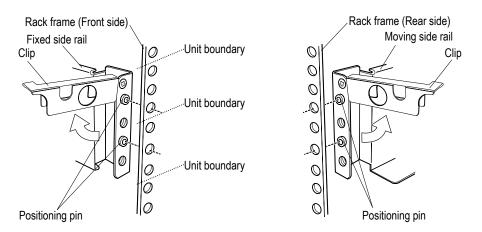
Removing Drive Box (2U) Installation Rails (for Circular Hole) - 2
